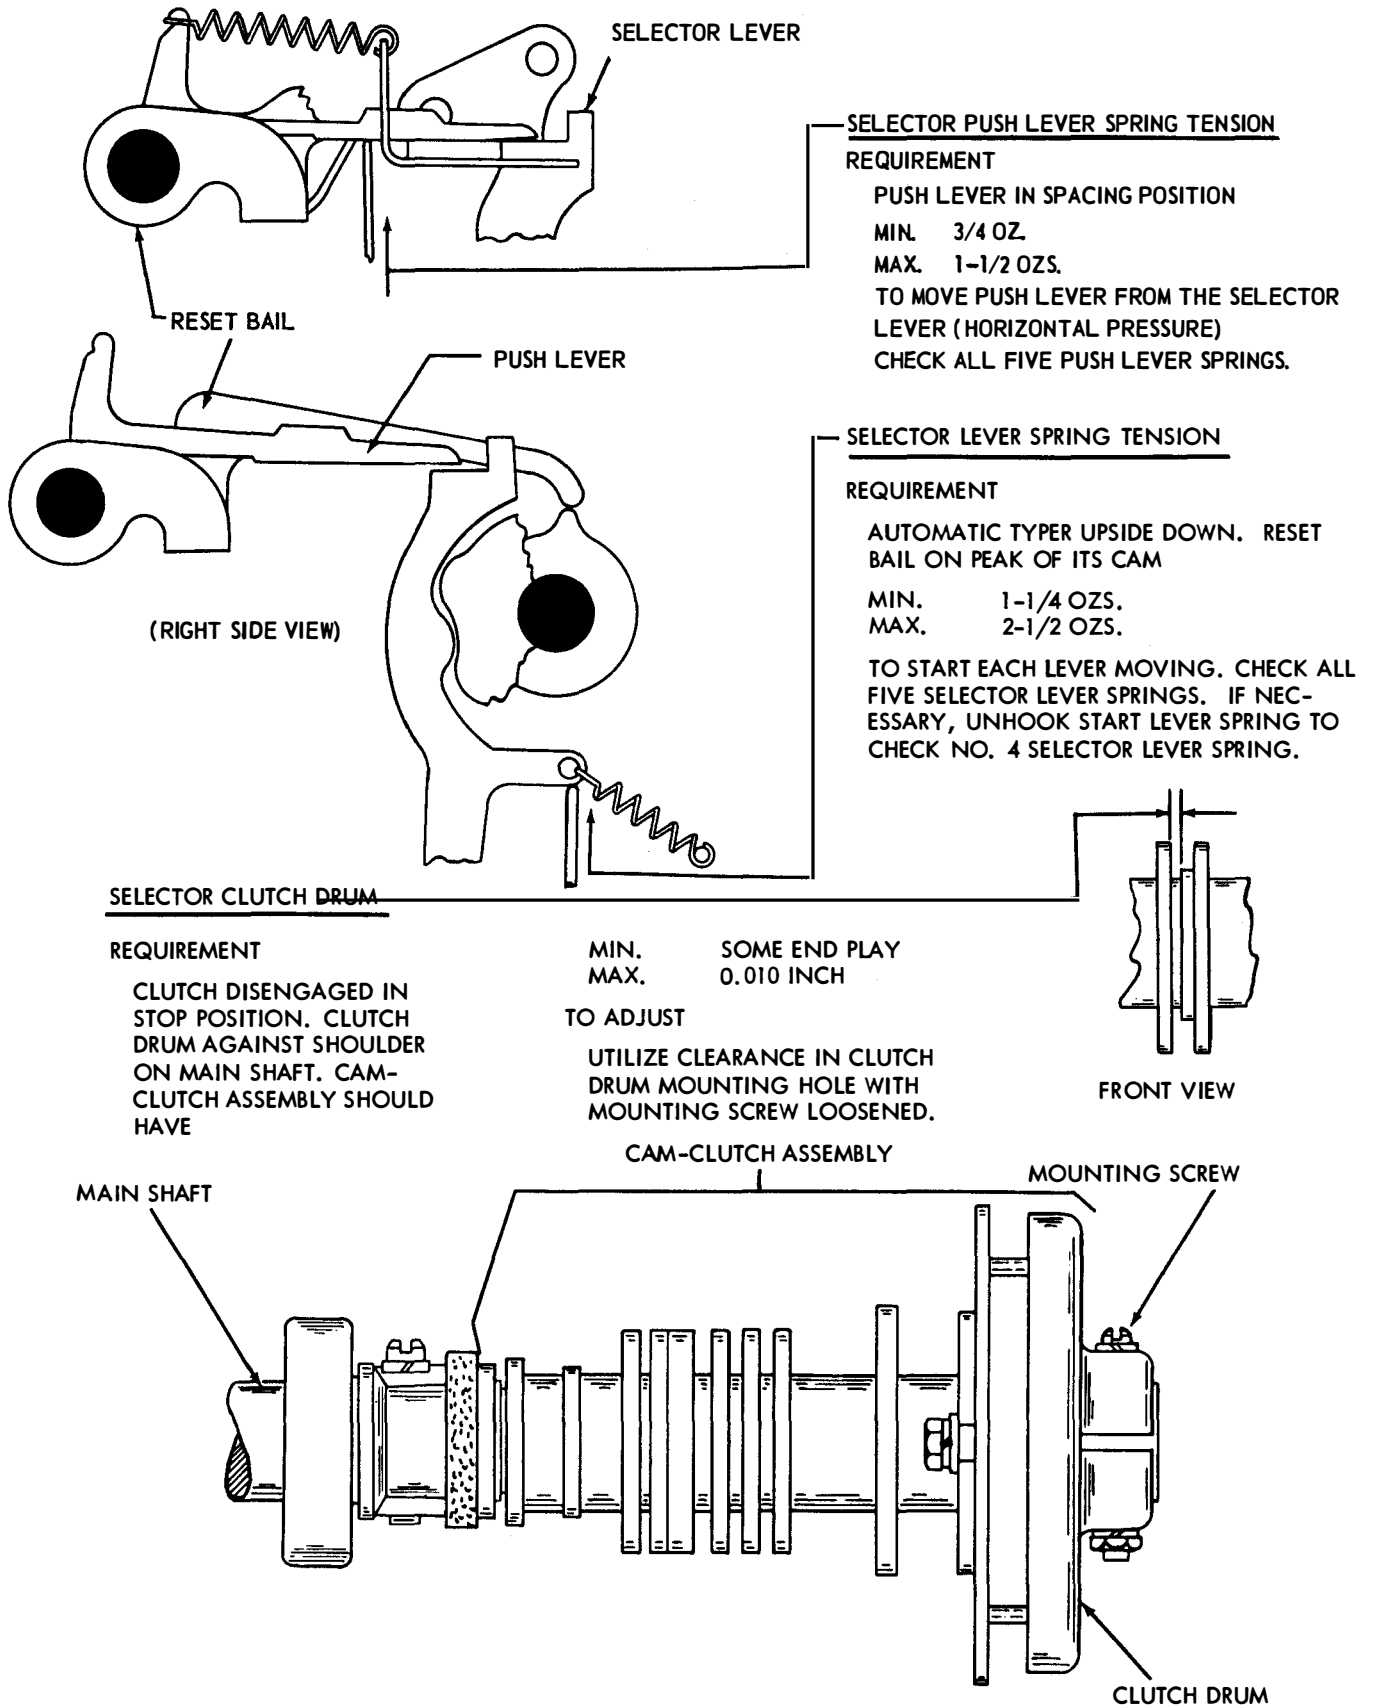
Automatic Typewriter, Selector Cam Clutch
